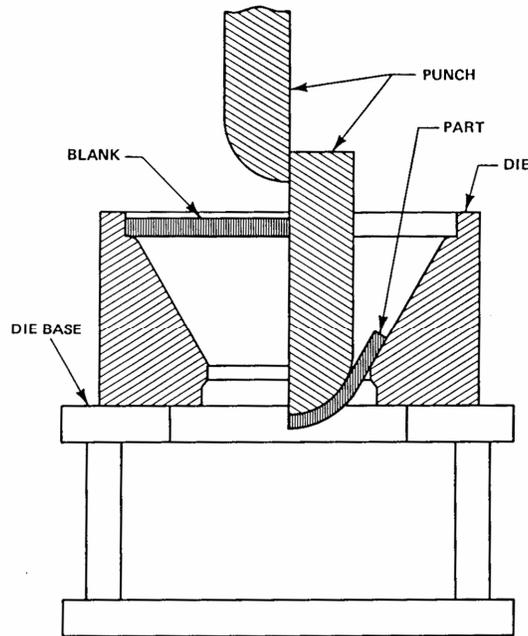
A cross-section view of a conical die used to deep draw a thick-walled hemishell of beryllium. Left side shows the die punch with blank in place before forming the part. The right side shows the formed part just prior to exiting the die.⁸
